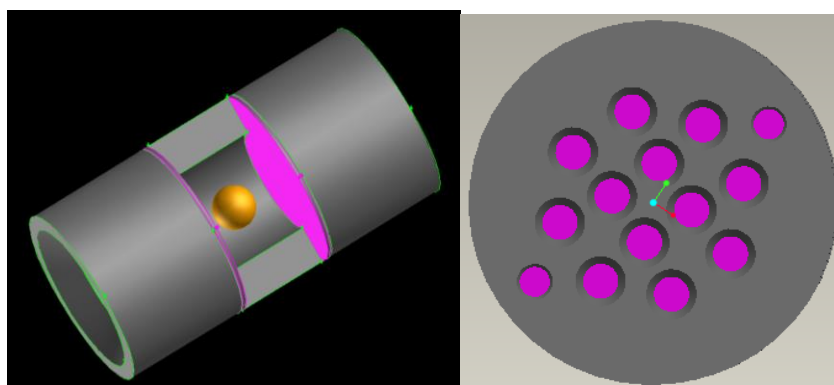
Front view of the pellet holder and sectioned detail of a pellet housing, closed between two metal wires.
